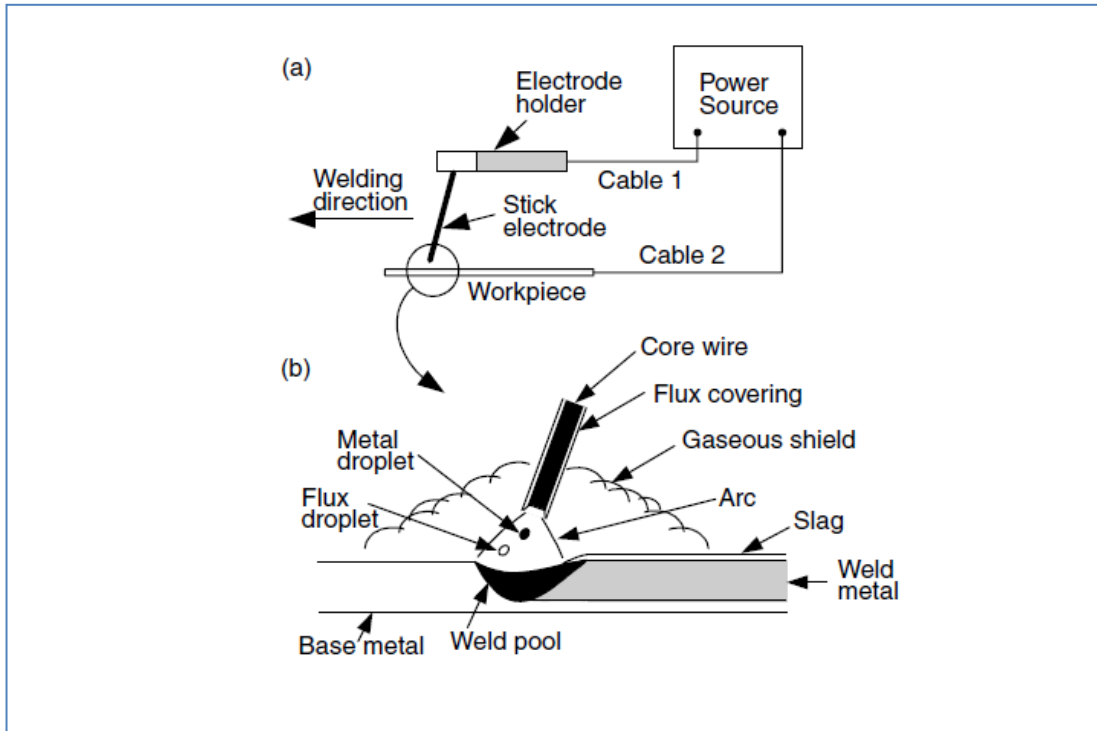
The Shielded Metal Arc Welding Process: (a) overall process; (b) welding area enlarged
